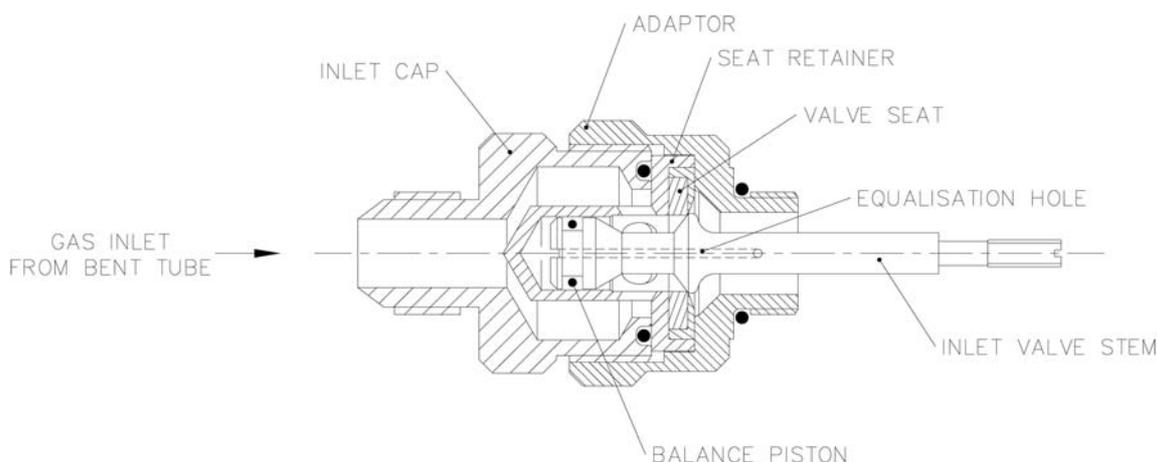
Ultraflow 601 Inlet Valve Assembly
